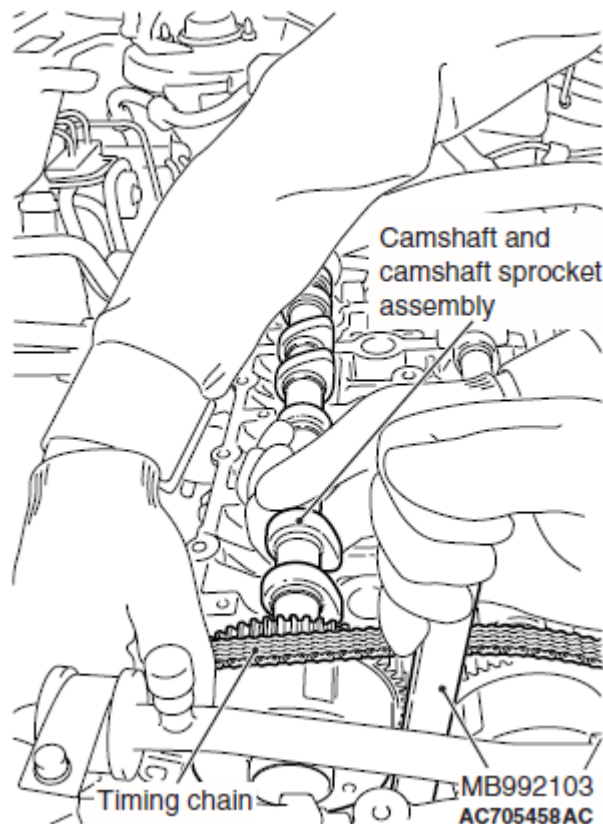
Removing Timing Chain From Camshaft And Camshaft Sprocket Assembly (Exhaust Side)
